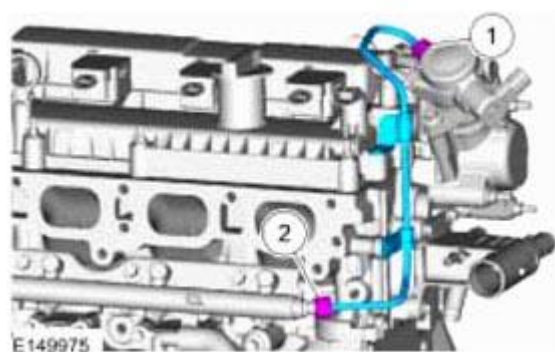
Identifying High Pressure Fuel Tube-To-Fuel Rail Flare Nut And High Pressure Fuel Tube-To-Fuel Injection Pump Flare Nut
